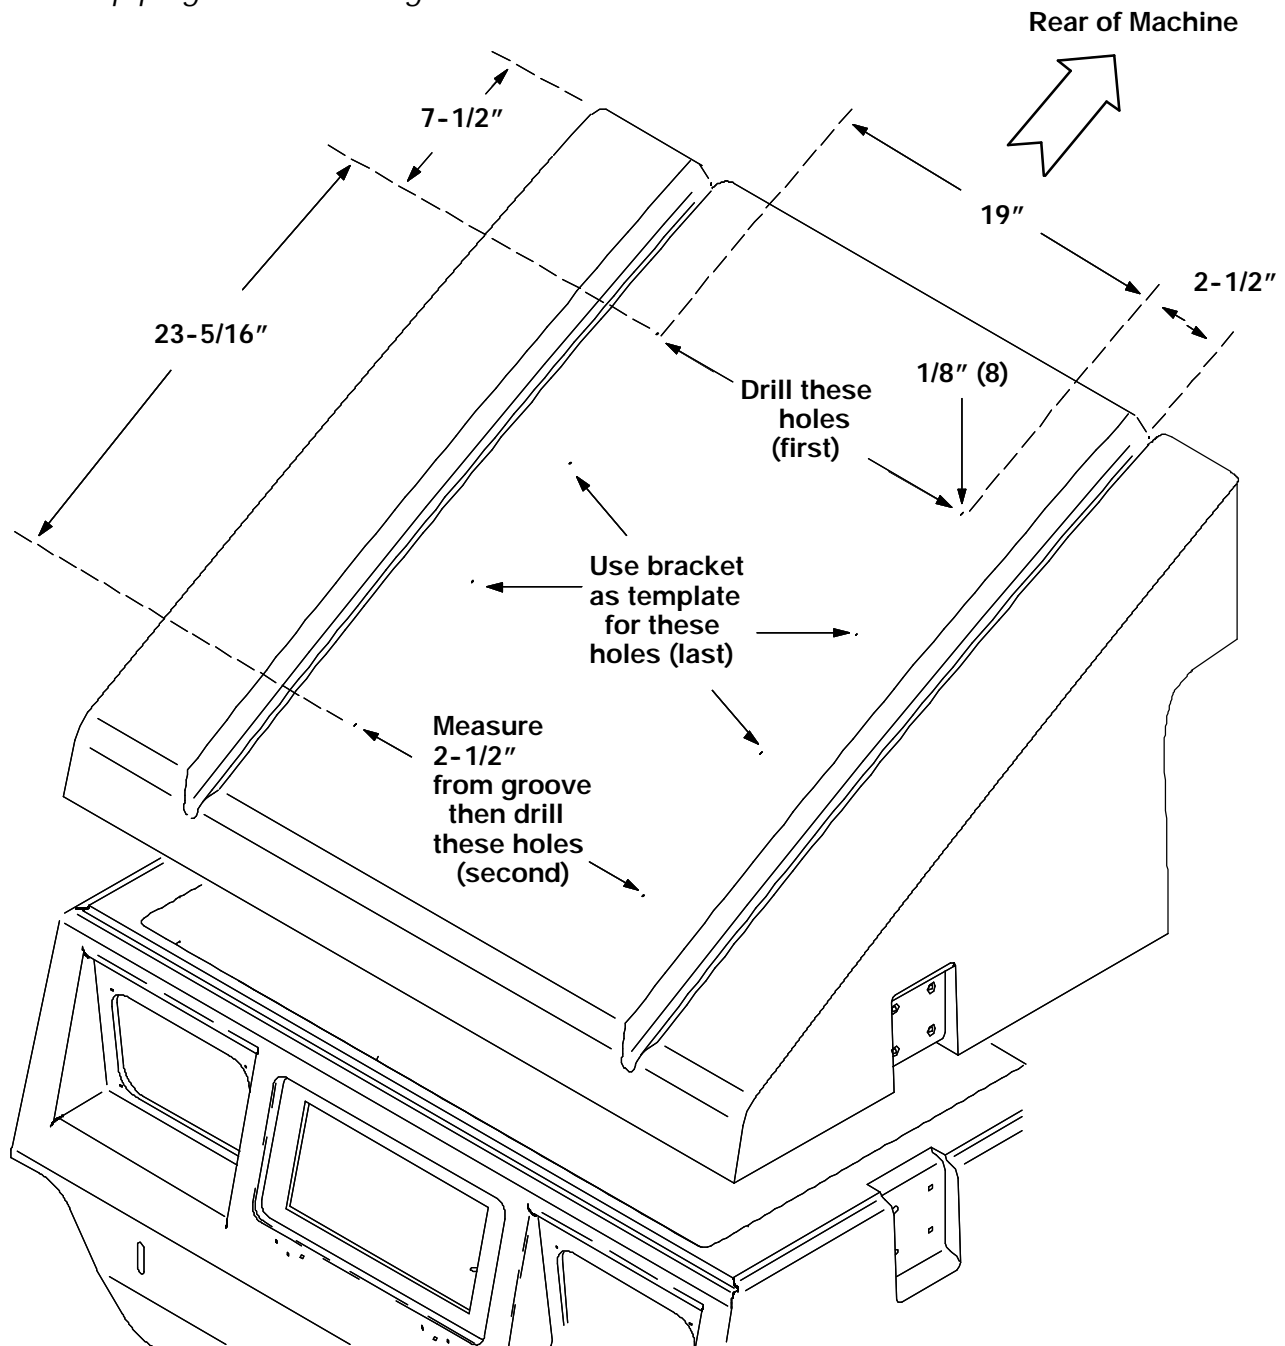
Location of Holes for Mounting Vacuum Wand Bracket
